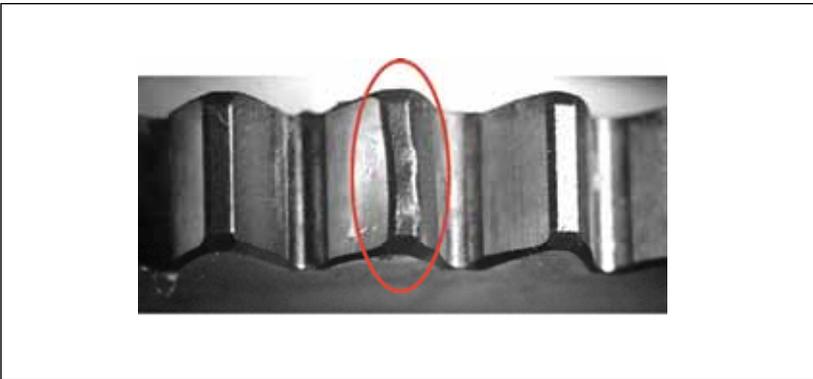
Severely deformed gear tooth as a result of engagement with largest chip tested, chip #7 having a mass of 0.342 grams. The gears can no longer be rotated to engage and pass through this tooth after using hand torque.
